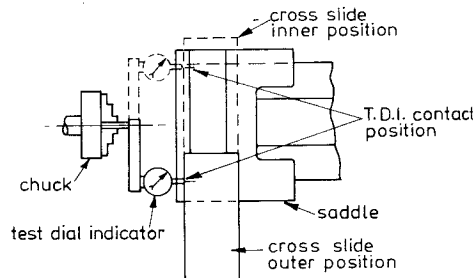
CROSS SLIDE ACCURACY TEST METHOD
